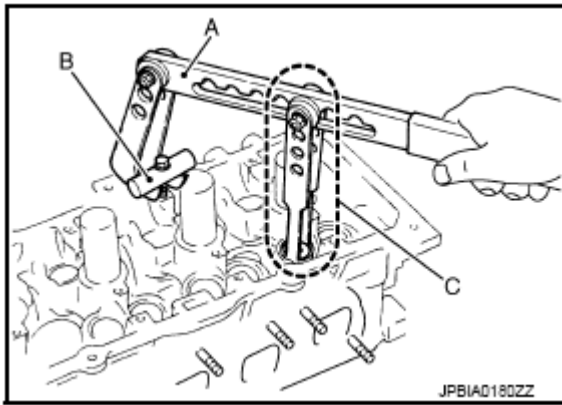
Compressing Valve Spring Using Valve Spring Compressor
